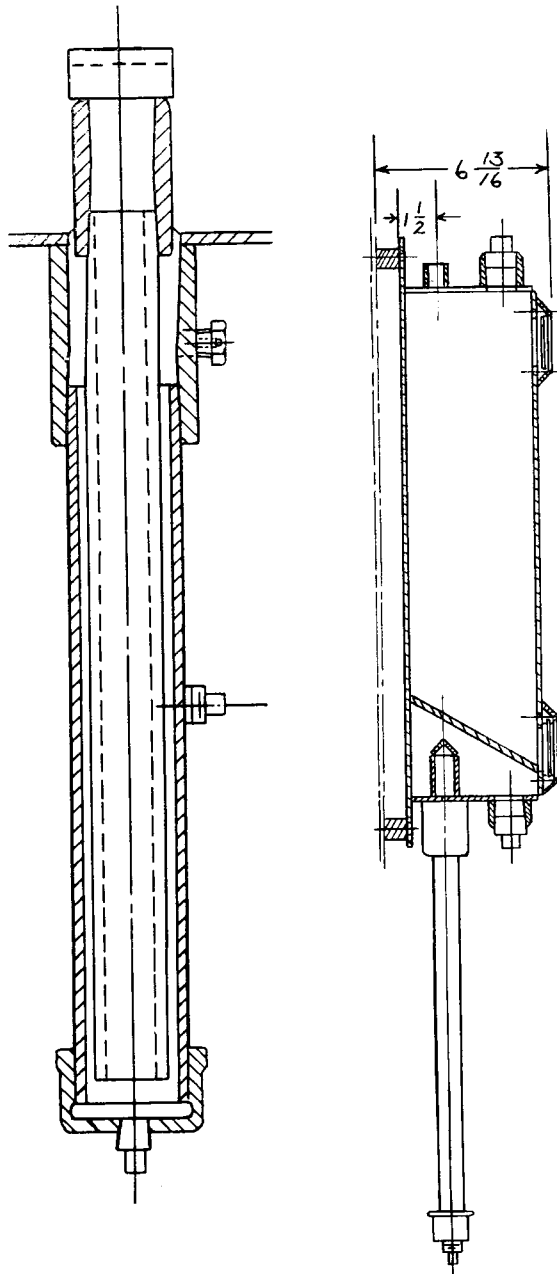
SECTIONS THROUGH BREATHING AND DEHYDRATING CHAMBER
